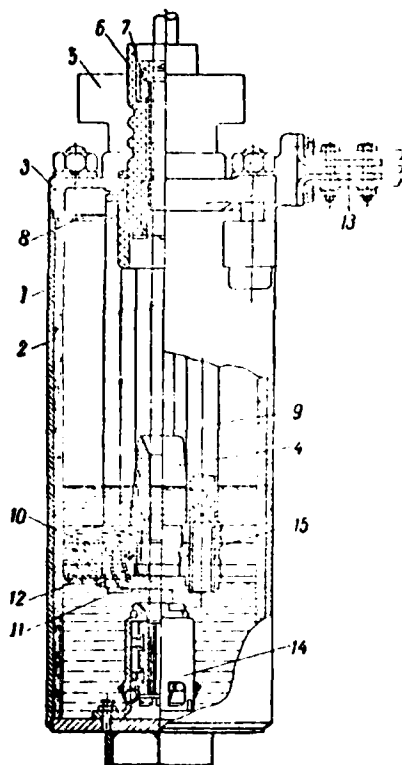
Tank of an oil breaker of the type MGG 229. 1 - tank; 2 - insulation of the tank; 3 - head; 4 - plug; 5 - contact knife; 6 - wall entrance insulator; 7 - multiplexing the contact bar; 8 - oil seal; 9 - brace of the arc-suppression chamber/camera; 10 - chamber/camera; 11 - shutter/valve with the springs; 12 - leather cuff; 13 - contact corner irons; 14 - socket contact; 15 - buffer space.
